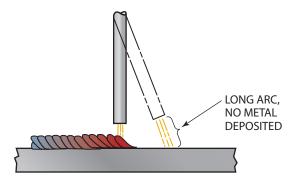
A long arc prevents metal or slag from being deposited ahead of the weld bead.
